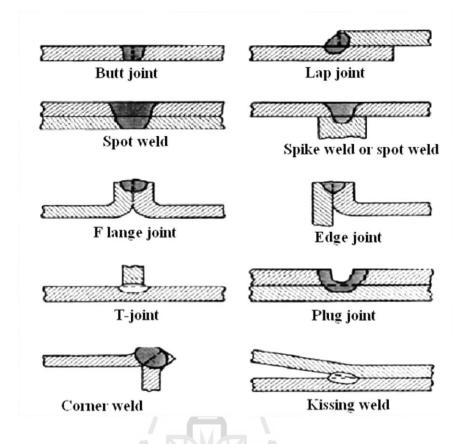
The joint design of laser welds on sheet materials (Shewell, 1977).
